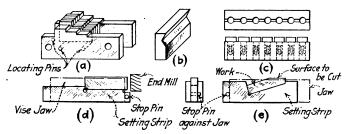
Sketches to show the use of special jaws and setting strips.
